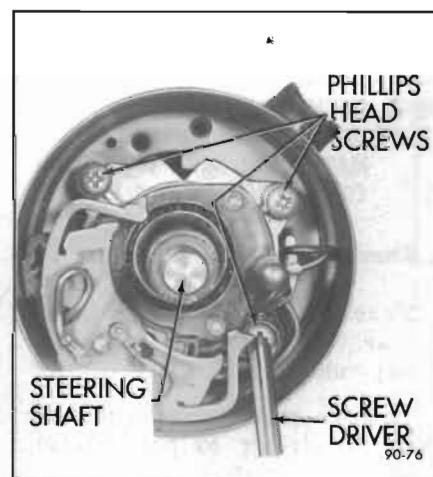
Removing Steering Shaft Upper Bearing Adapter Screws
